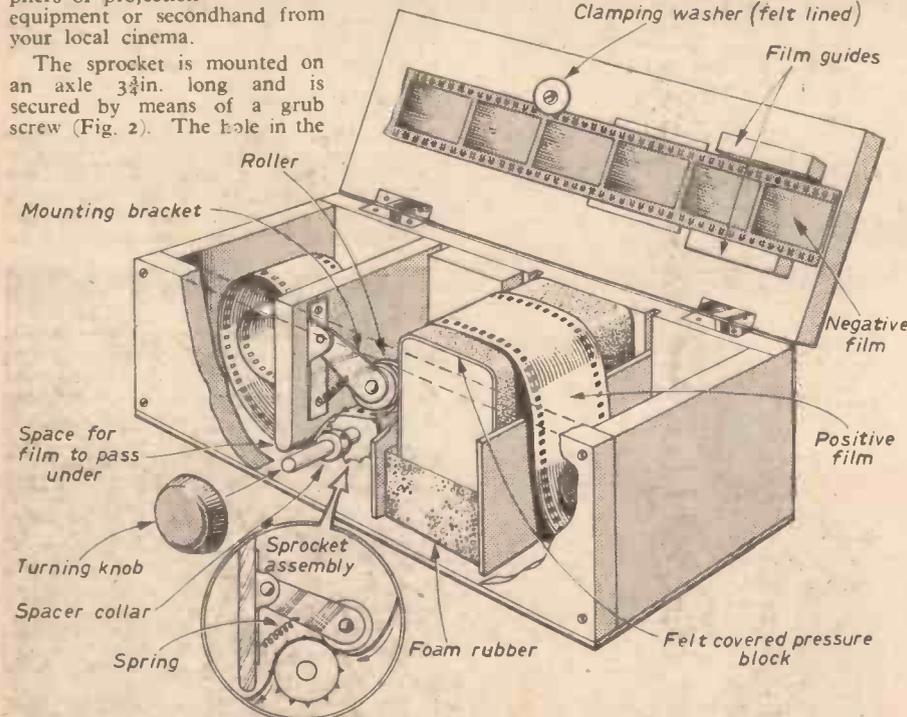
General arrangement of the printer, showing method of threading film through.
